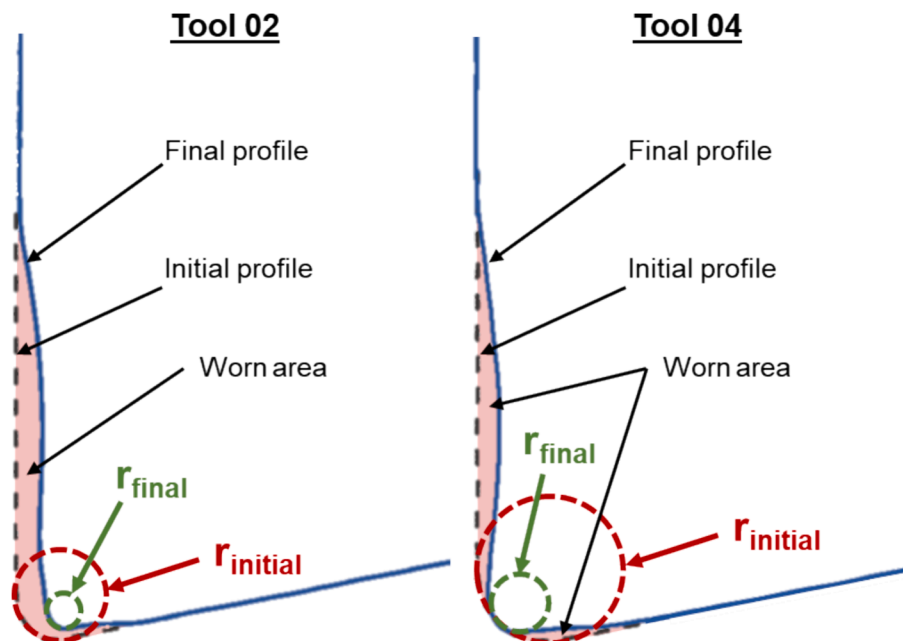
Initial and final tool profile for tool 02 and tool 04.
